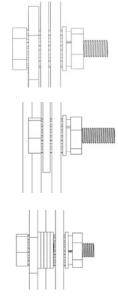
Cross brace to rear rail support (frame extension) to frame assembly
